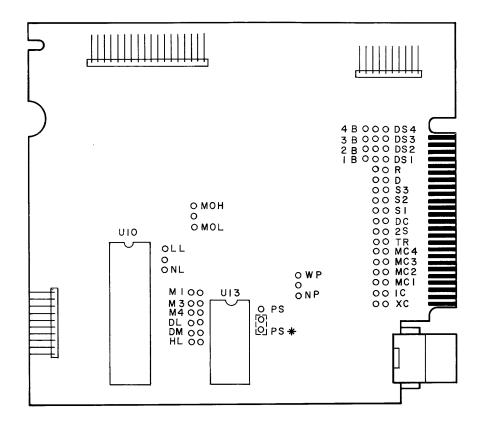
NON-LSI CIRCUIT BOARD ASSEMBLY
